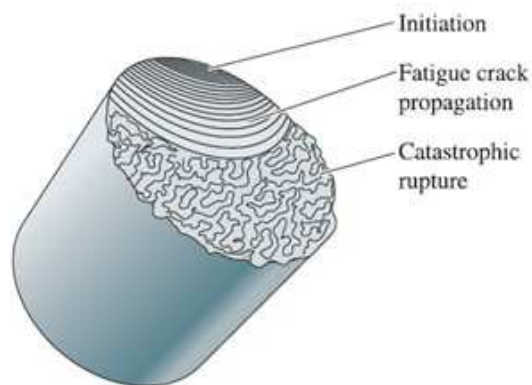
Schematic Representation of a Fatigue Fracture Surface
